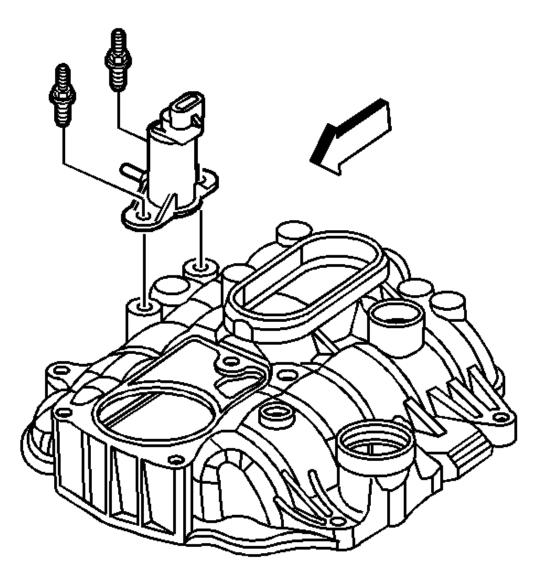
View Of EVAP Canister Purge Solenoid Valve Courtesy of GENERAL MOTORS CORP.
